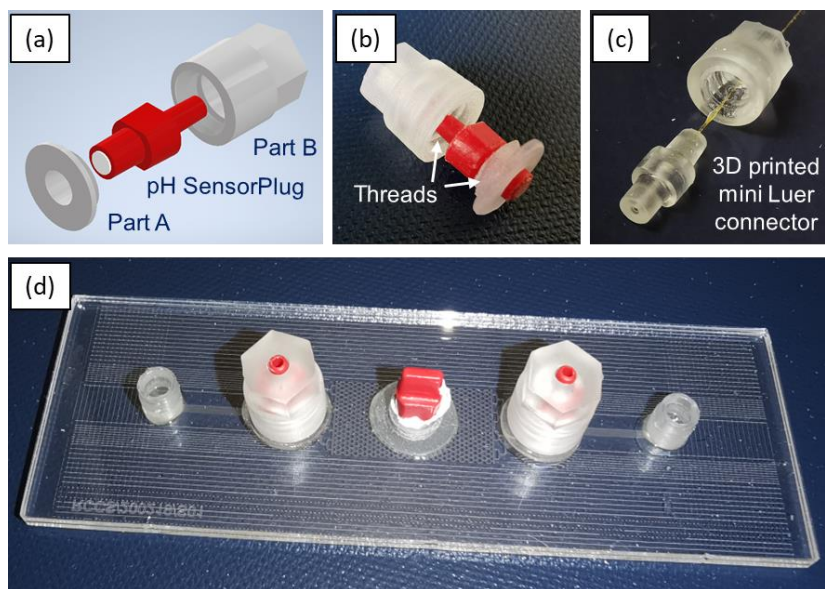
Custom connectors manufactured using a Form 2 3D printer: (a) 3D drawing, (b) 3D printed parts with a fitted pH SensorPlug, (c) 3D printed mini Luer connector with a built-in FOP-MIV sensor, and (d) glass microfluidic devices with connected pH SensorPlugs.
